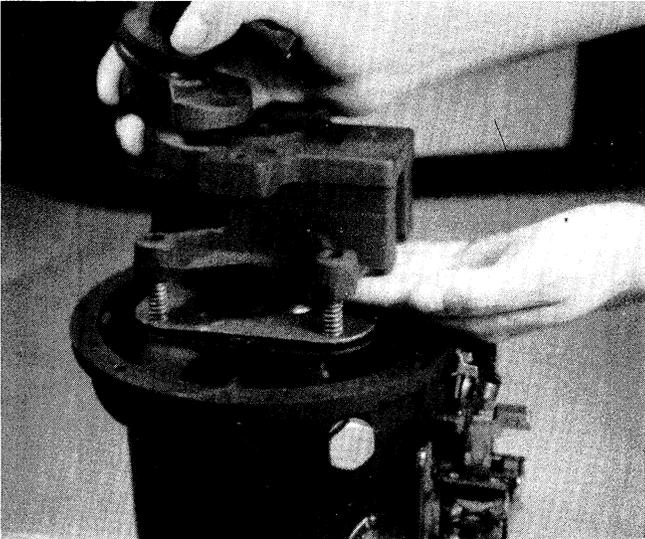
Lowering Spin Cage Base on Brake Assembly
